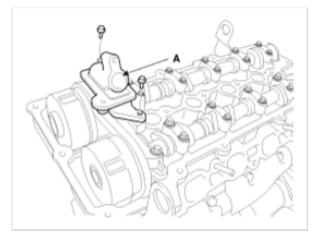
Identifying Oil Control Valve Adapter Courtesy of HYUNDAI MOTOR AMERICA
